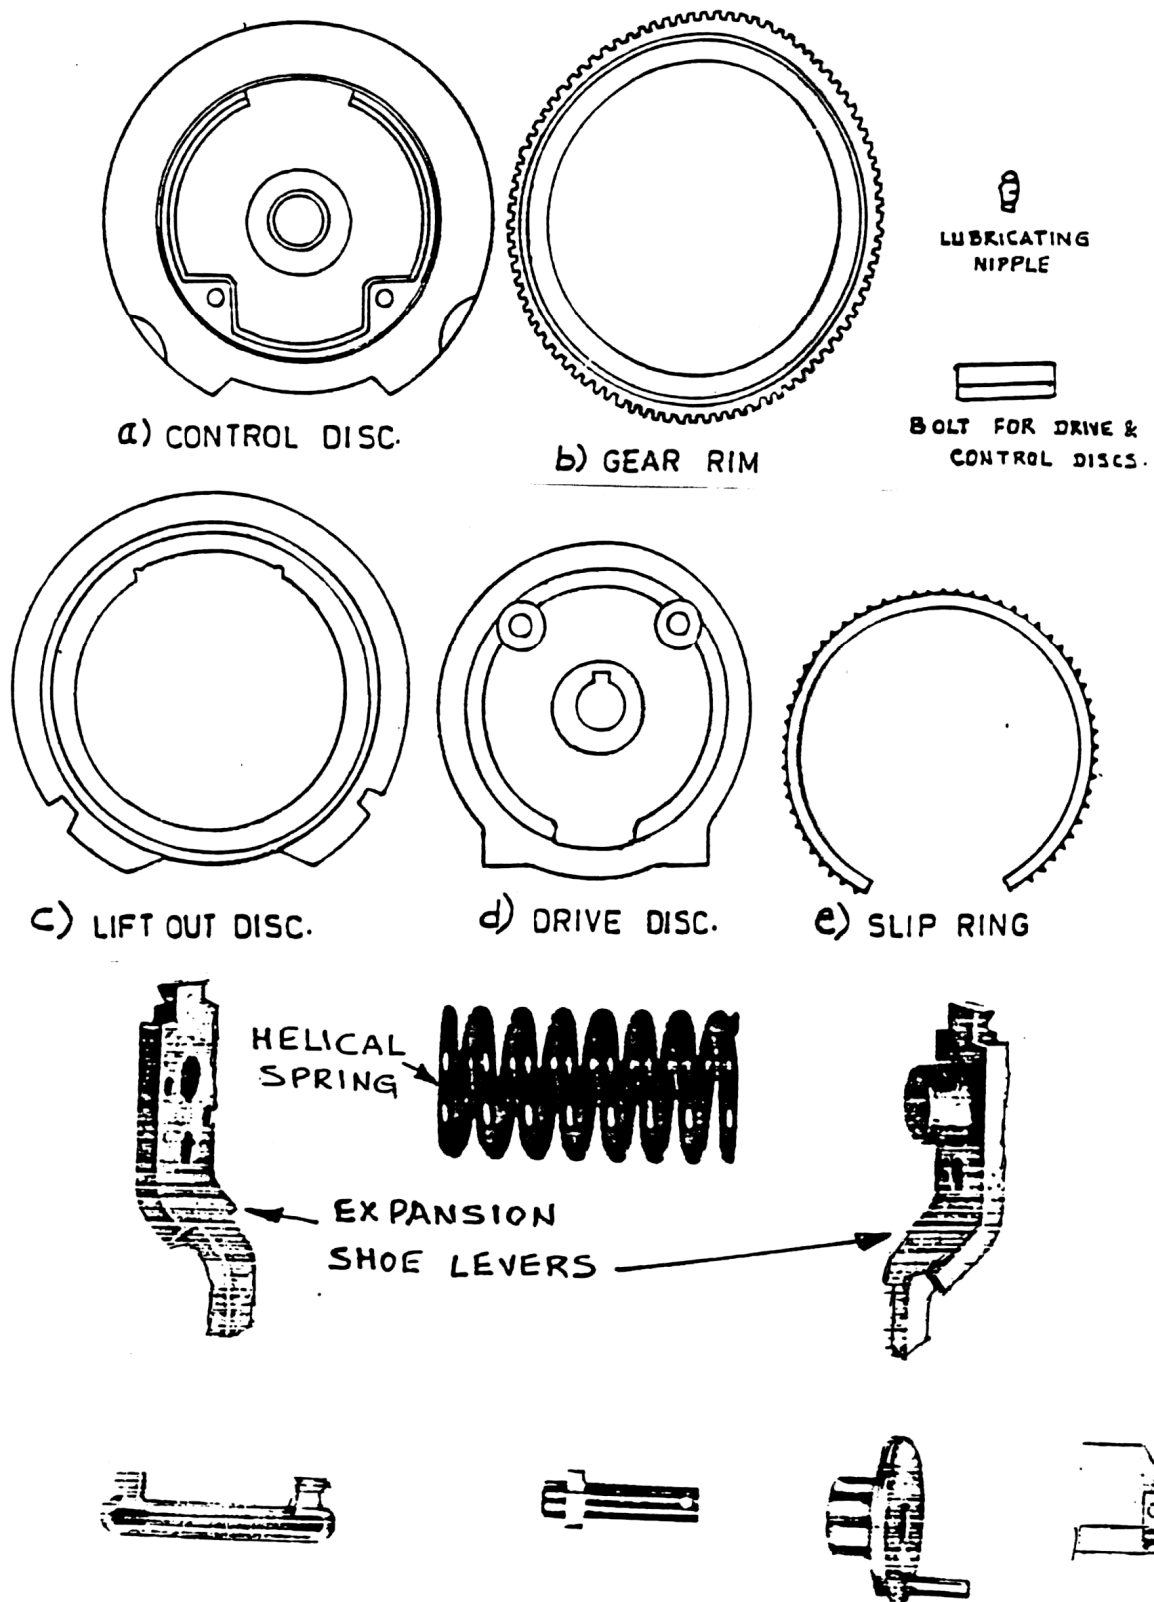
(a to e) FRICTION CLUTCH ASSEMBLY
